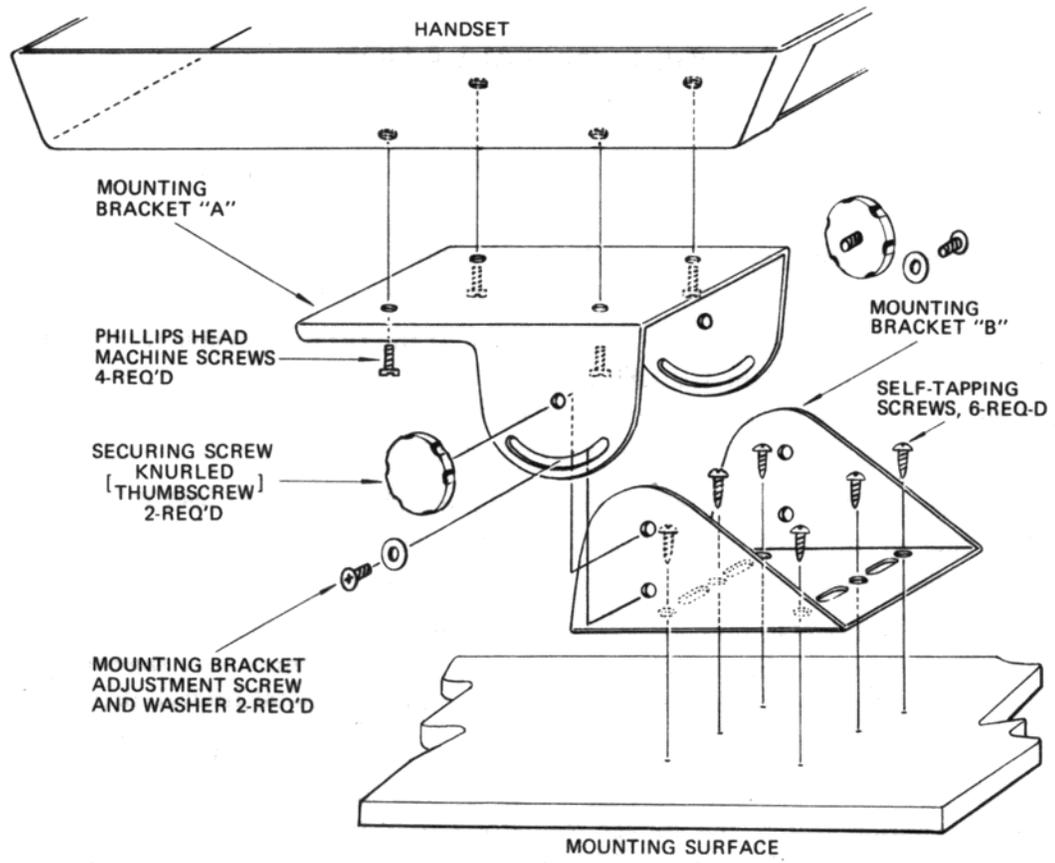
TRANSCEIVER MOUNTING, EXPLODED VIEW
